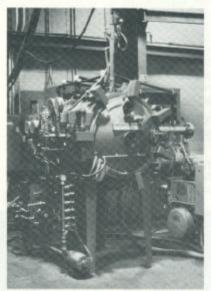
Horizontal furnace with flammable gas burnoff for debinder and sinter operations.
